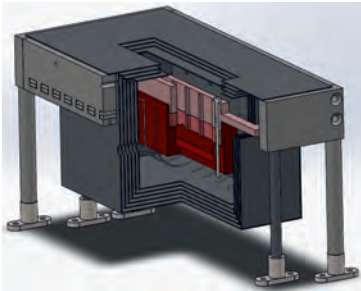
Sketch of the crucible and heat shield assembly. The assembly also shows the filament wire.
